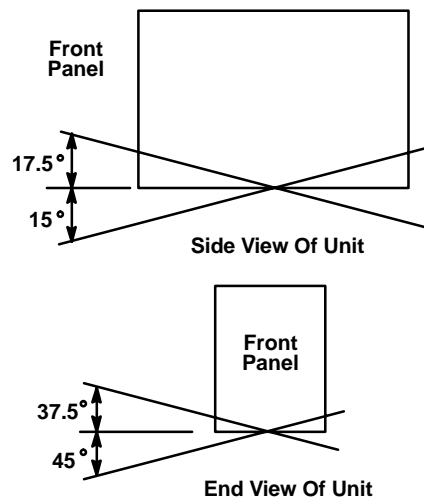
Allowable Tilt Angles For Welding Generator Engine
